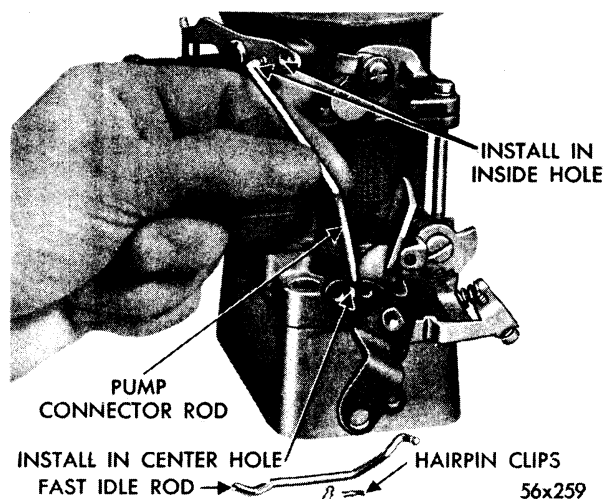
Removing or Installing Fast Idle and Pump Connector
